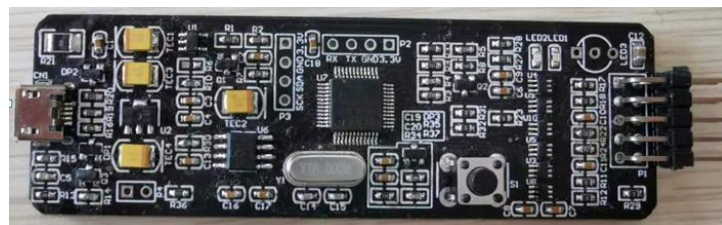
HC-LINK V4.0 (footprint see PCB board back)
